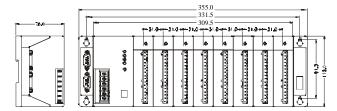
ADAM-5000/TCP system & I/O module dimensions
